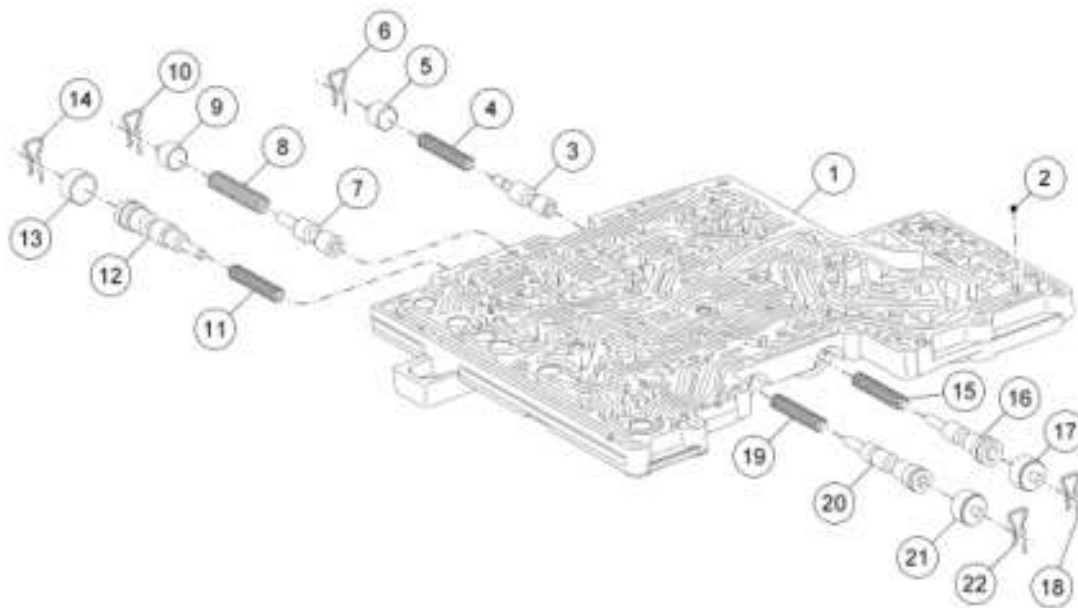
Exploded View Of Mechatronic Assembly With Torque Specifications
